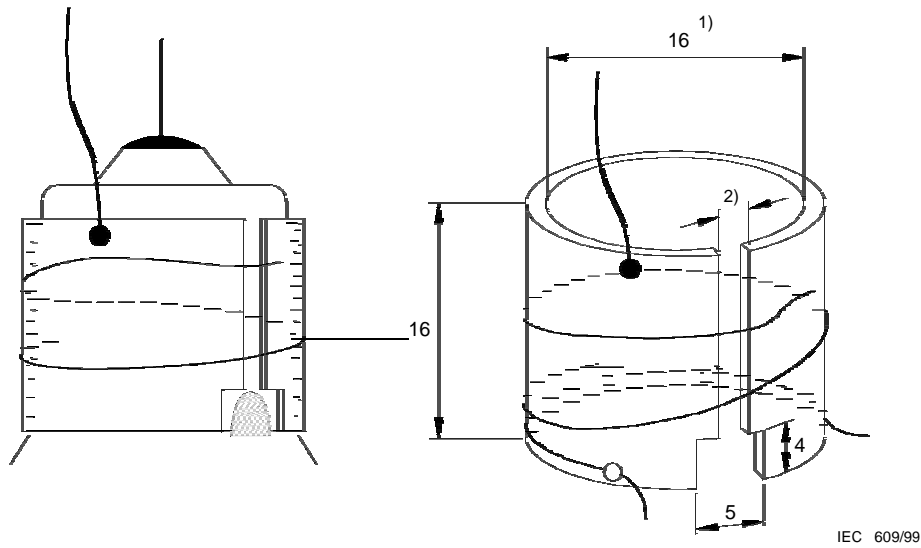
Position of a typical test lampholder and thermocouple (spring not shown)
